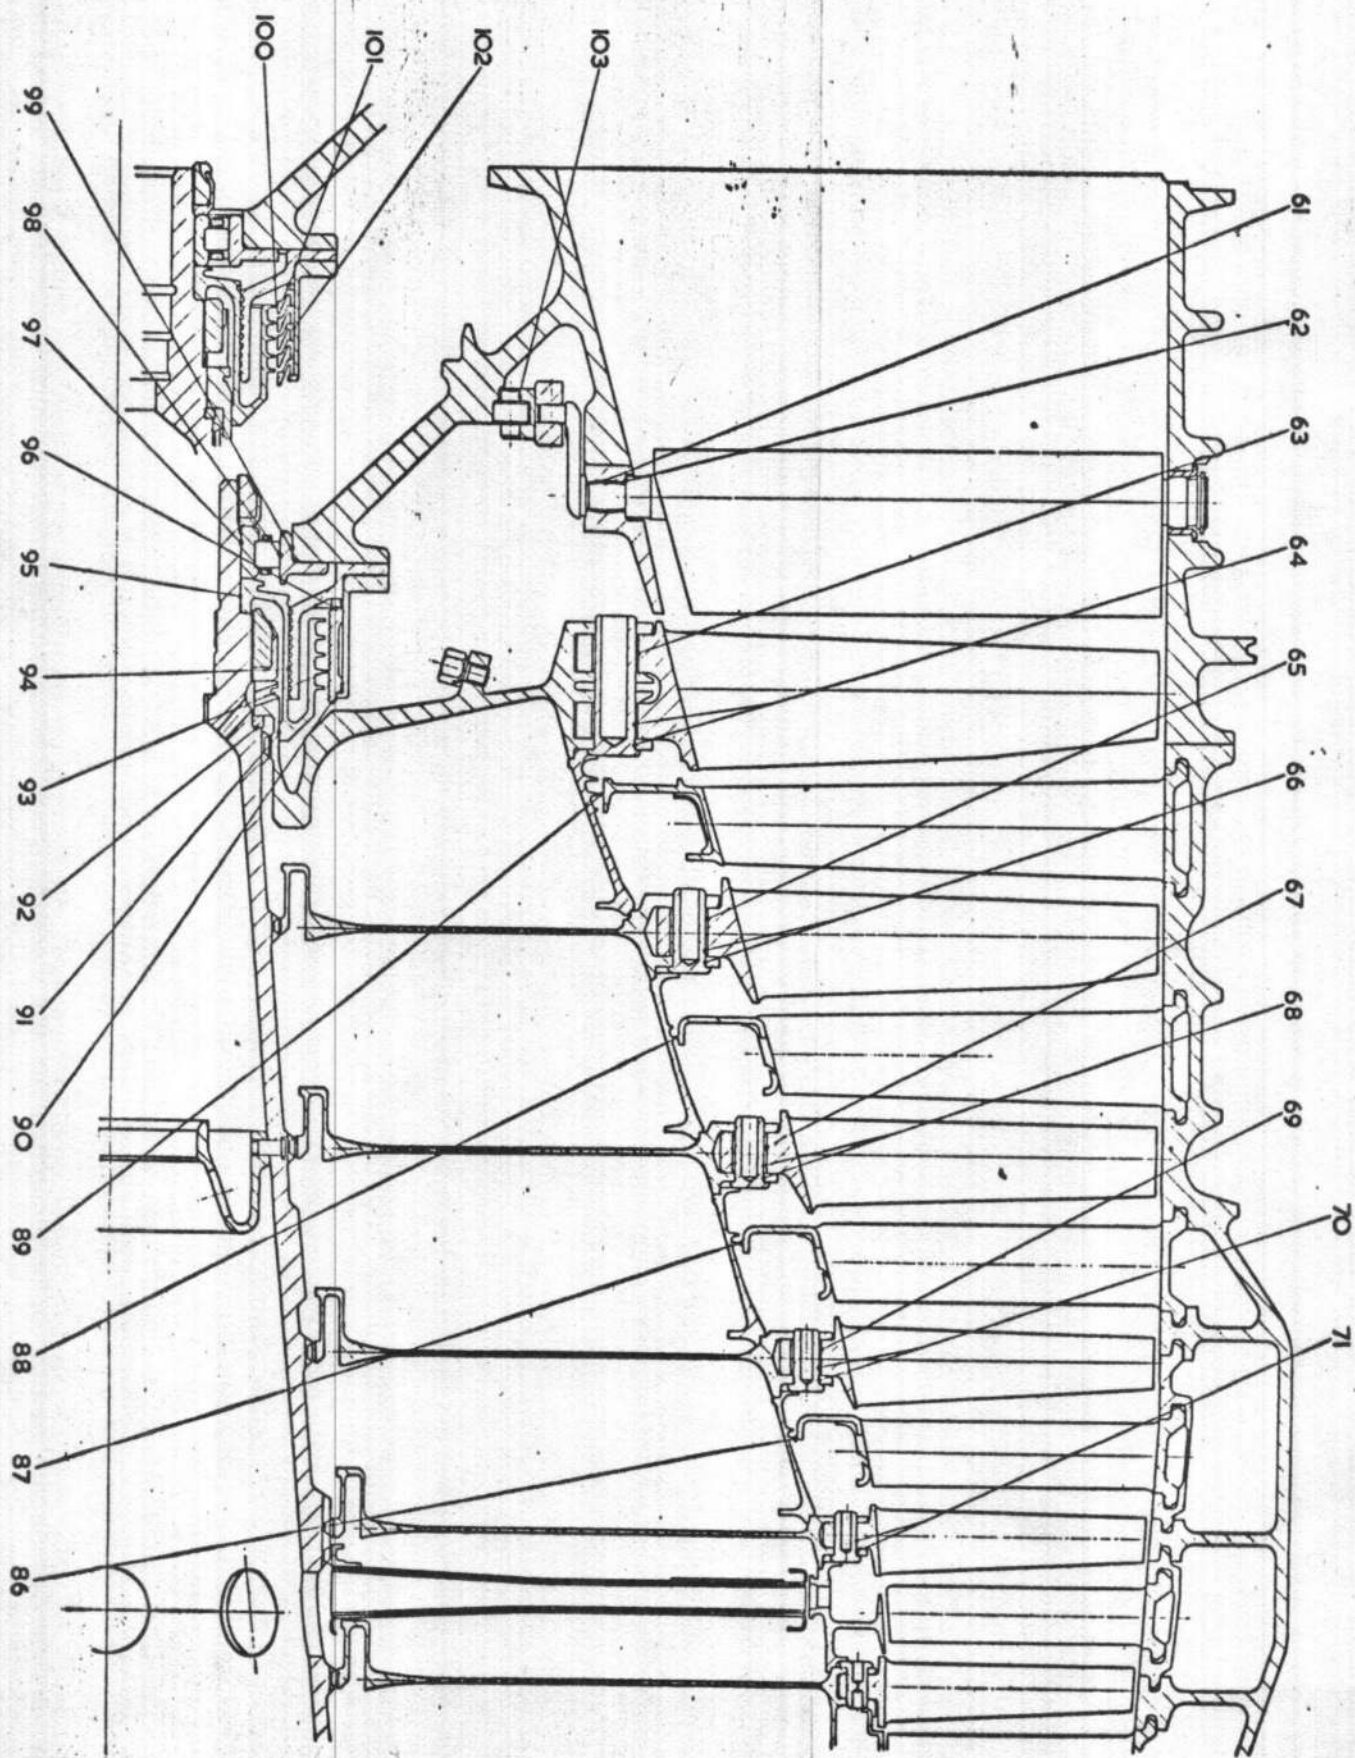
Front bearing housing, compressor shafts, rotors and outlet casing
